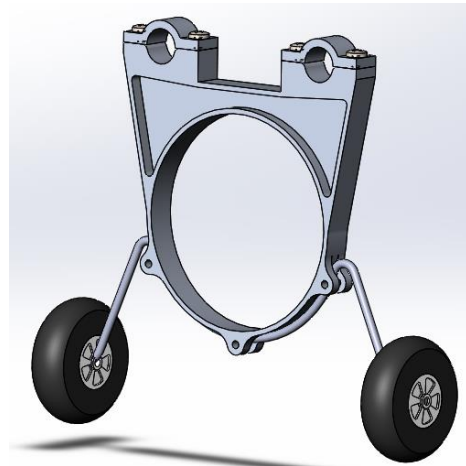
Final Design of Production Aircraft Landing Gear
